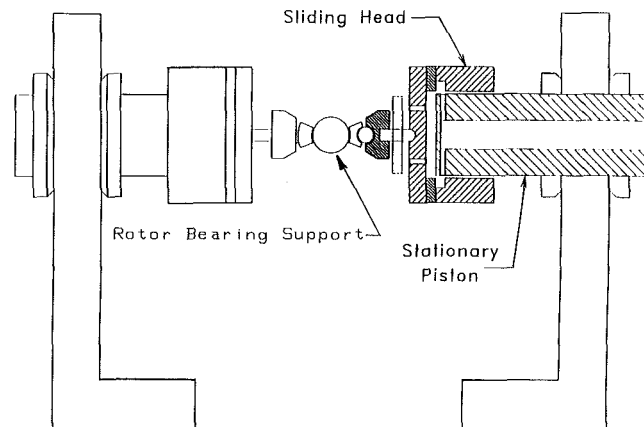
Inlet-varying gas damper with two actuators (end view)
